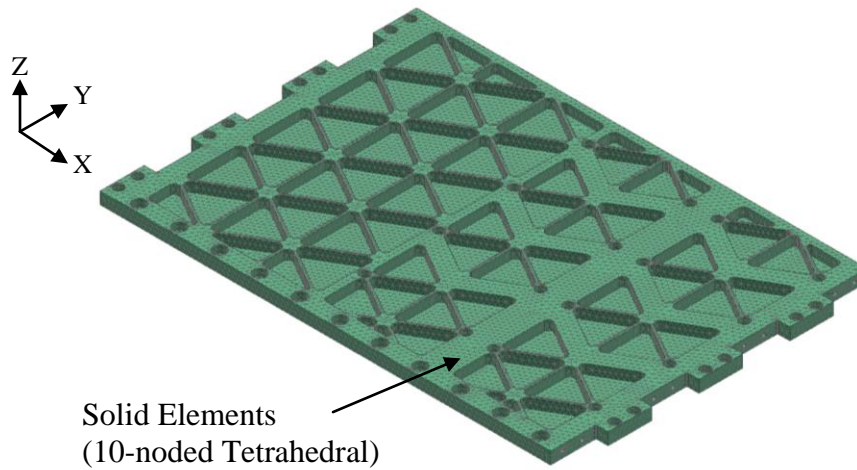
Wall-FEM-3 Consisting of 10-noded Tetrahedral Elements
